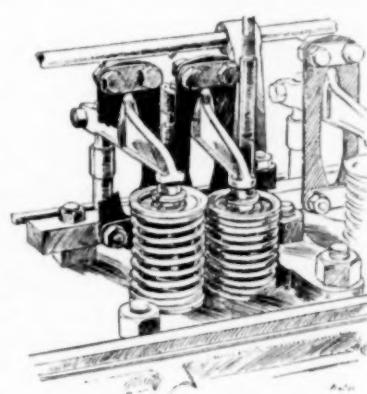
VALVE-OPERATING GEAR OF THE ASTER ENGINE
